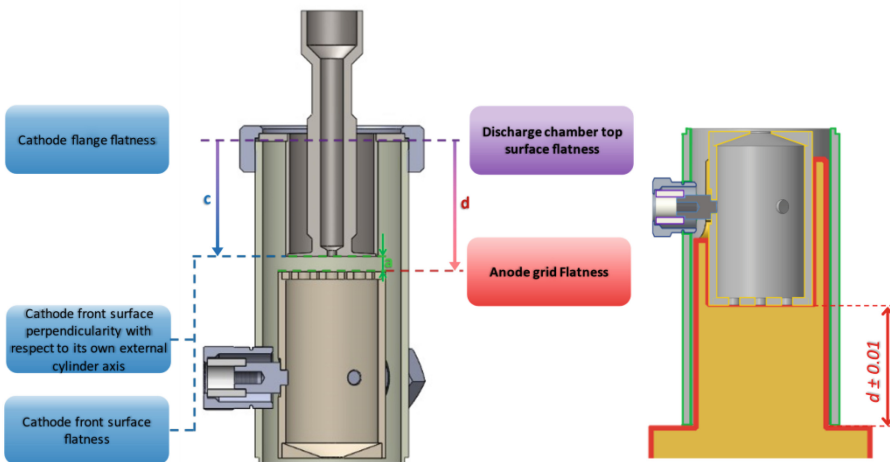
FEBIAD ion source tolerance stackup elements by considering the assembly tool to perform the mounting strategy
